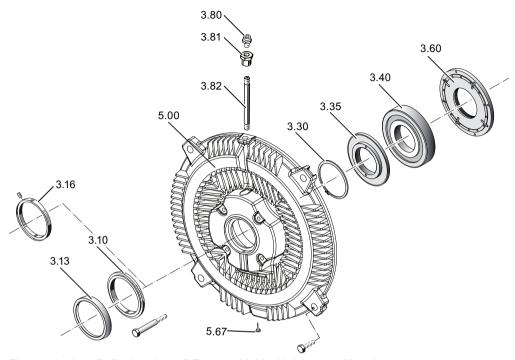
Roller bearings, DE - end shield with integrated bearing cover
